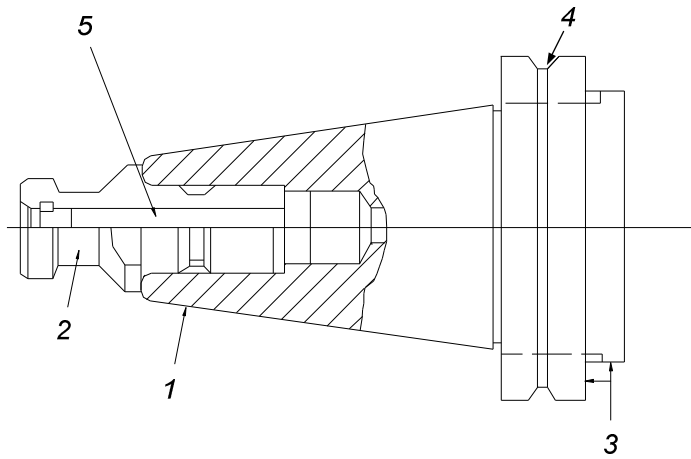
Steep taper shank for rotating tools: 1 – tapered base surface, 2 – tool tang, 3 – tool centering and fixing surfaces, 4 – grip for tool changer, 5 – hole for coolant flow
